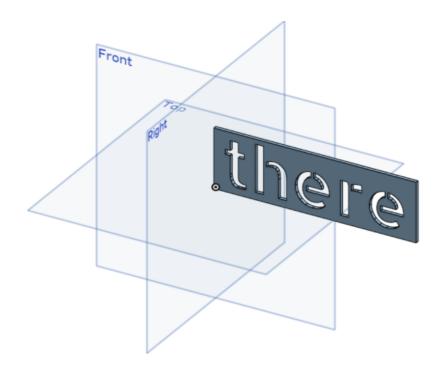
Isometric Onshape Drawing of Stencil 2 "there" design (Onshape Link in Appendix)
